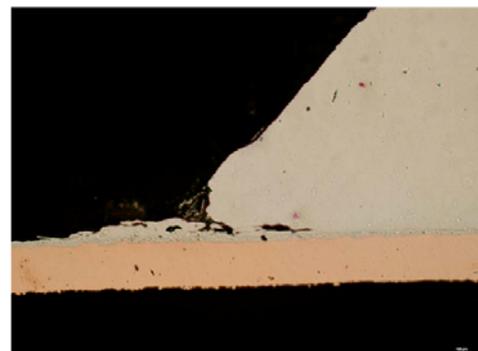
The fatigue crack emerging at the outer edge of the soldered joint
